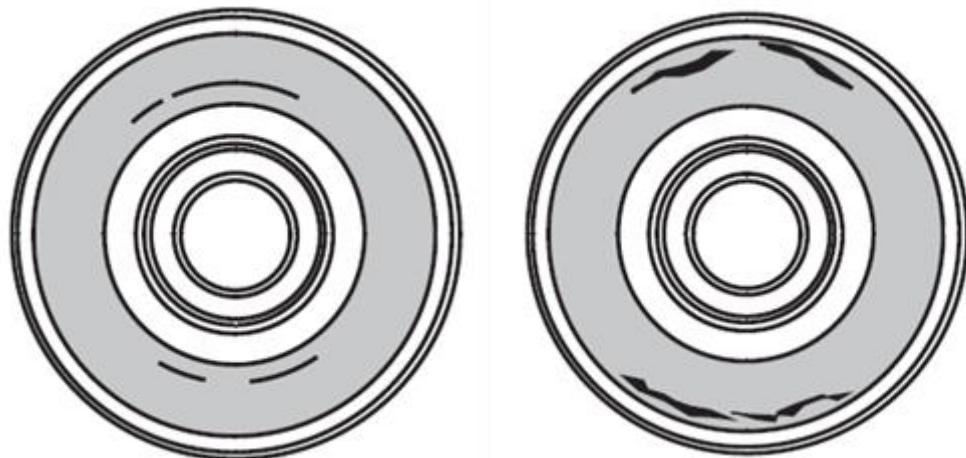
Example of Acceptable Cracks on Rubber Bushings
